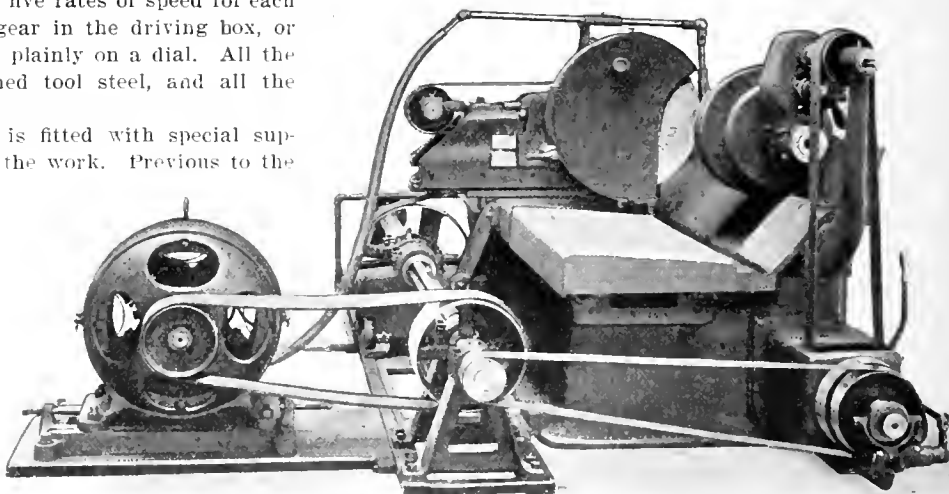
End View of Gap Grinder, showing also Details of Self-contained Electric Drive
